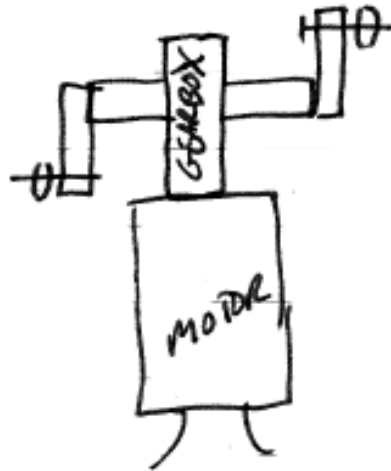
current motor gearbox setup driving two slider cranks agitation mechanisms (top-view)
